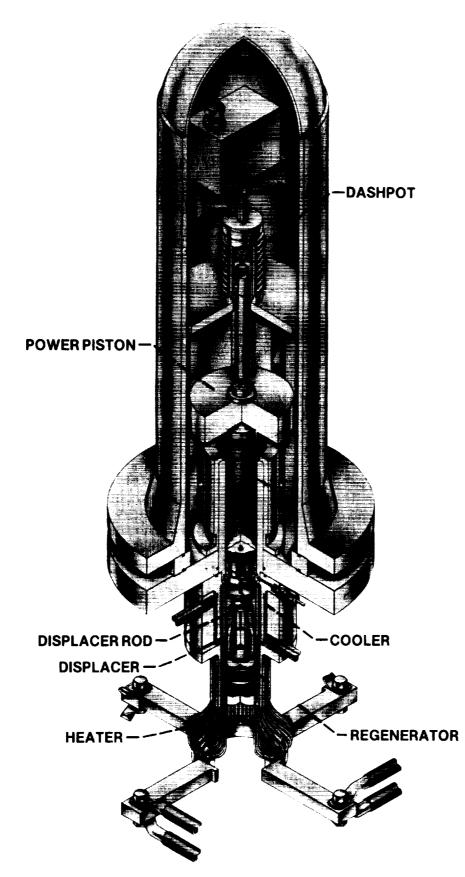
DRAWING OF RE-1000 ENGINE (8).
